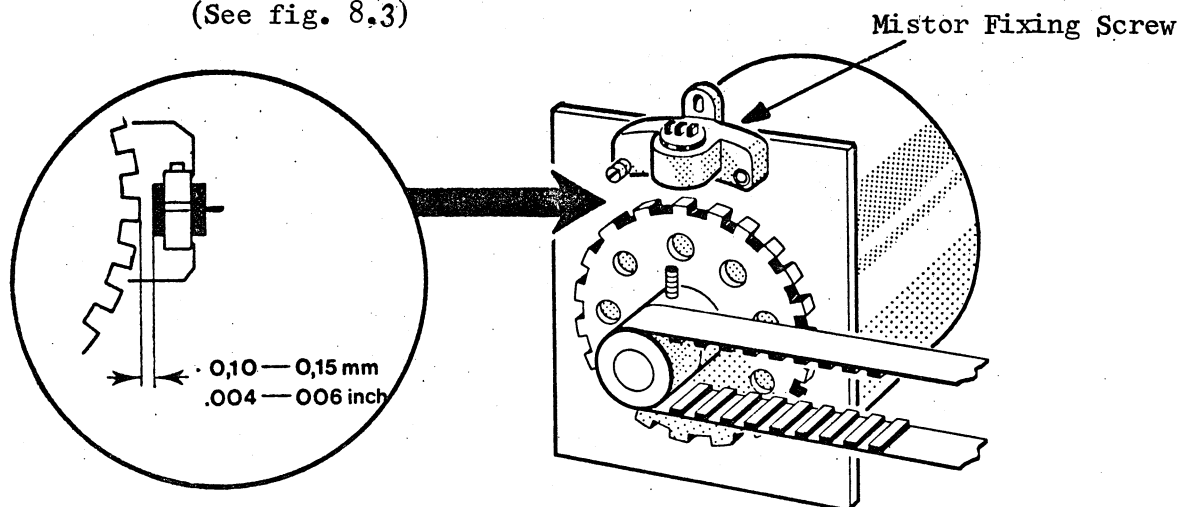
Mistor Support Assembly for the "MARA" Mechanics
